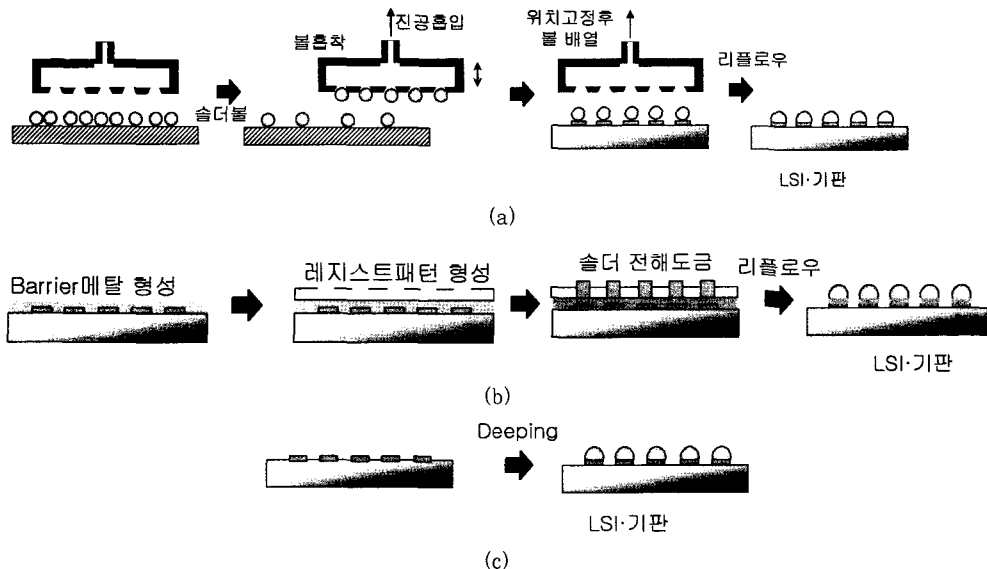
Solder bumping methods. (a) ball bumping (b) electroplating (c) deeping
